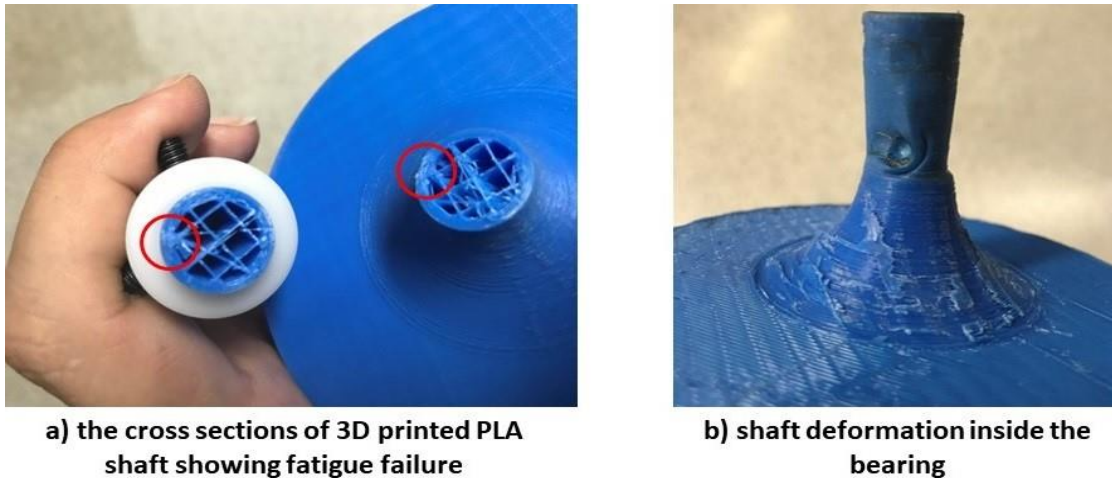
Fatigue failure and origin of fatigue: a) the cross sections of failed 3D printer PLA shaft: the red circle shows the fracture zone, and b) shaft deformation inside the bearing due to local high temperature.
